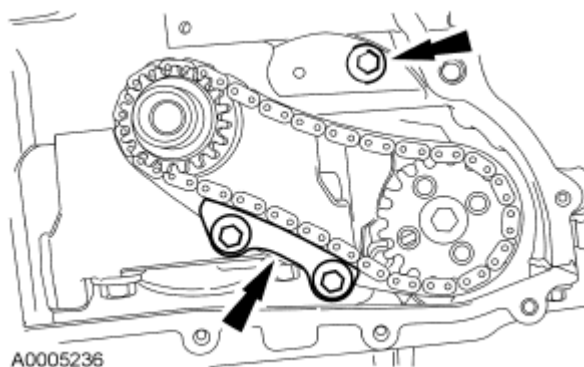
Locating Oil Pump Chain Guide & Shoulder Bolts
